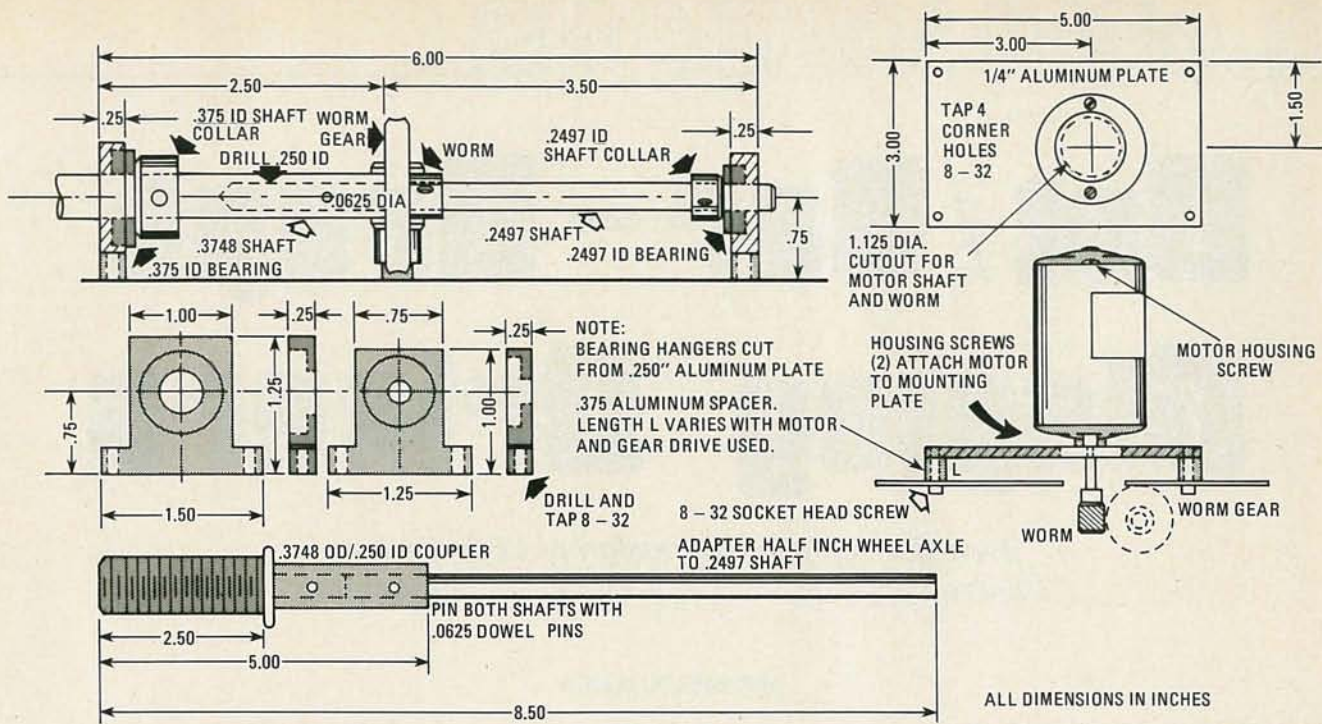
MORE COMPLEX DRIVE MECHANISM is shown above. Power is transmitted to wheels through right angles, by means of worms. Gear motor drive is simpler and more reliable.
